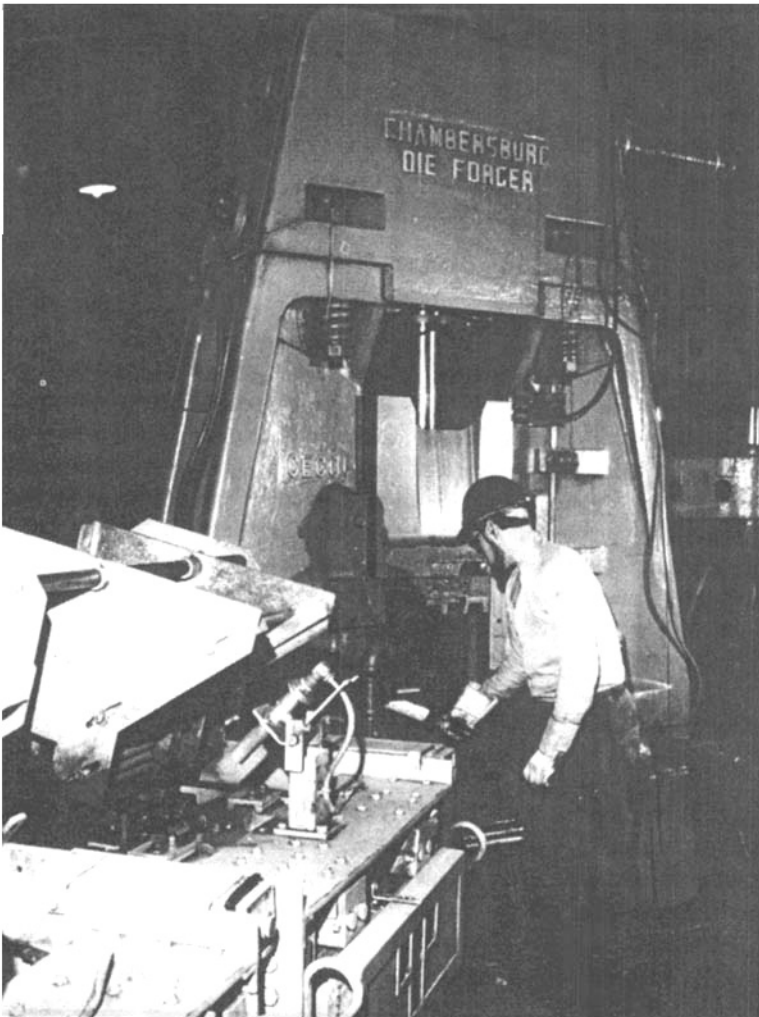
Forging hammer. Source: Courtesy of Chambersburg Engineering Co.
